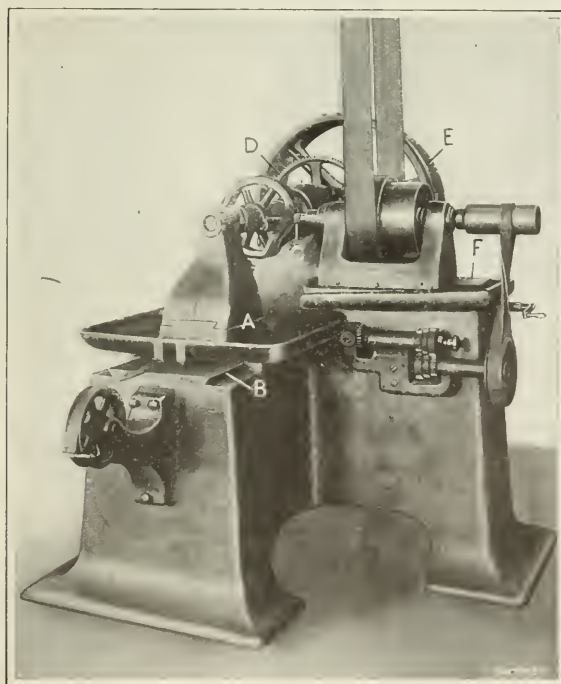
Universal Cam Cutting Machine for making Cams used on "Radical" Automatics
